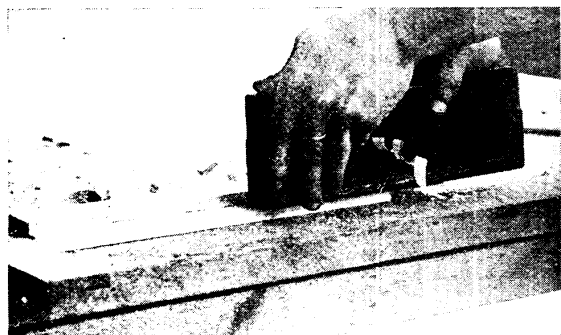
Rebates for fitting the door panels for the stand cabinet are being made. The tool used is a rebating plane
